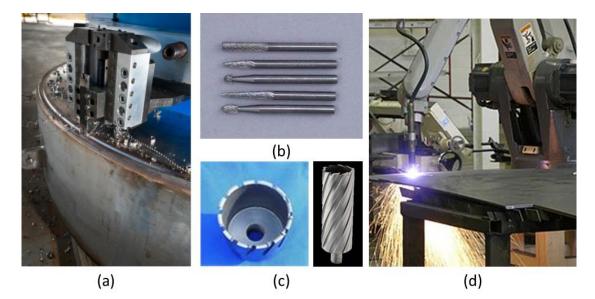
Examples of Various Cutting Approaches: (a) Skiving, (b) Milling Burrs, (c) Slitting Bit, and (d) PlasmaTorch
